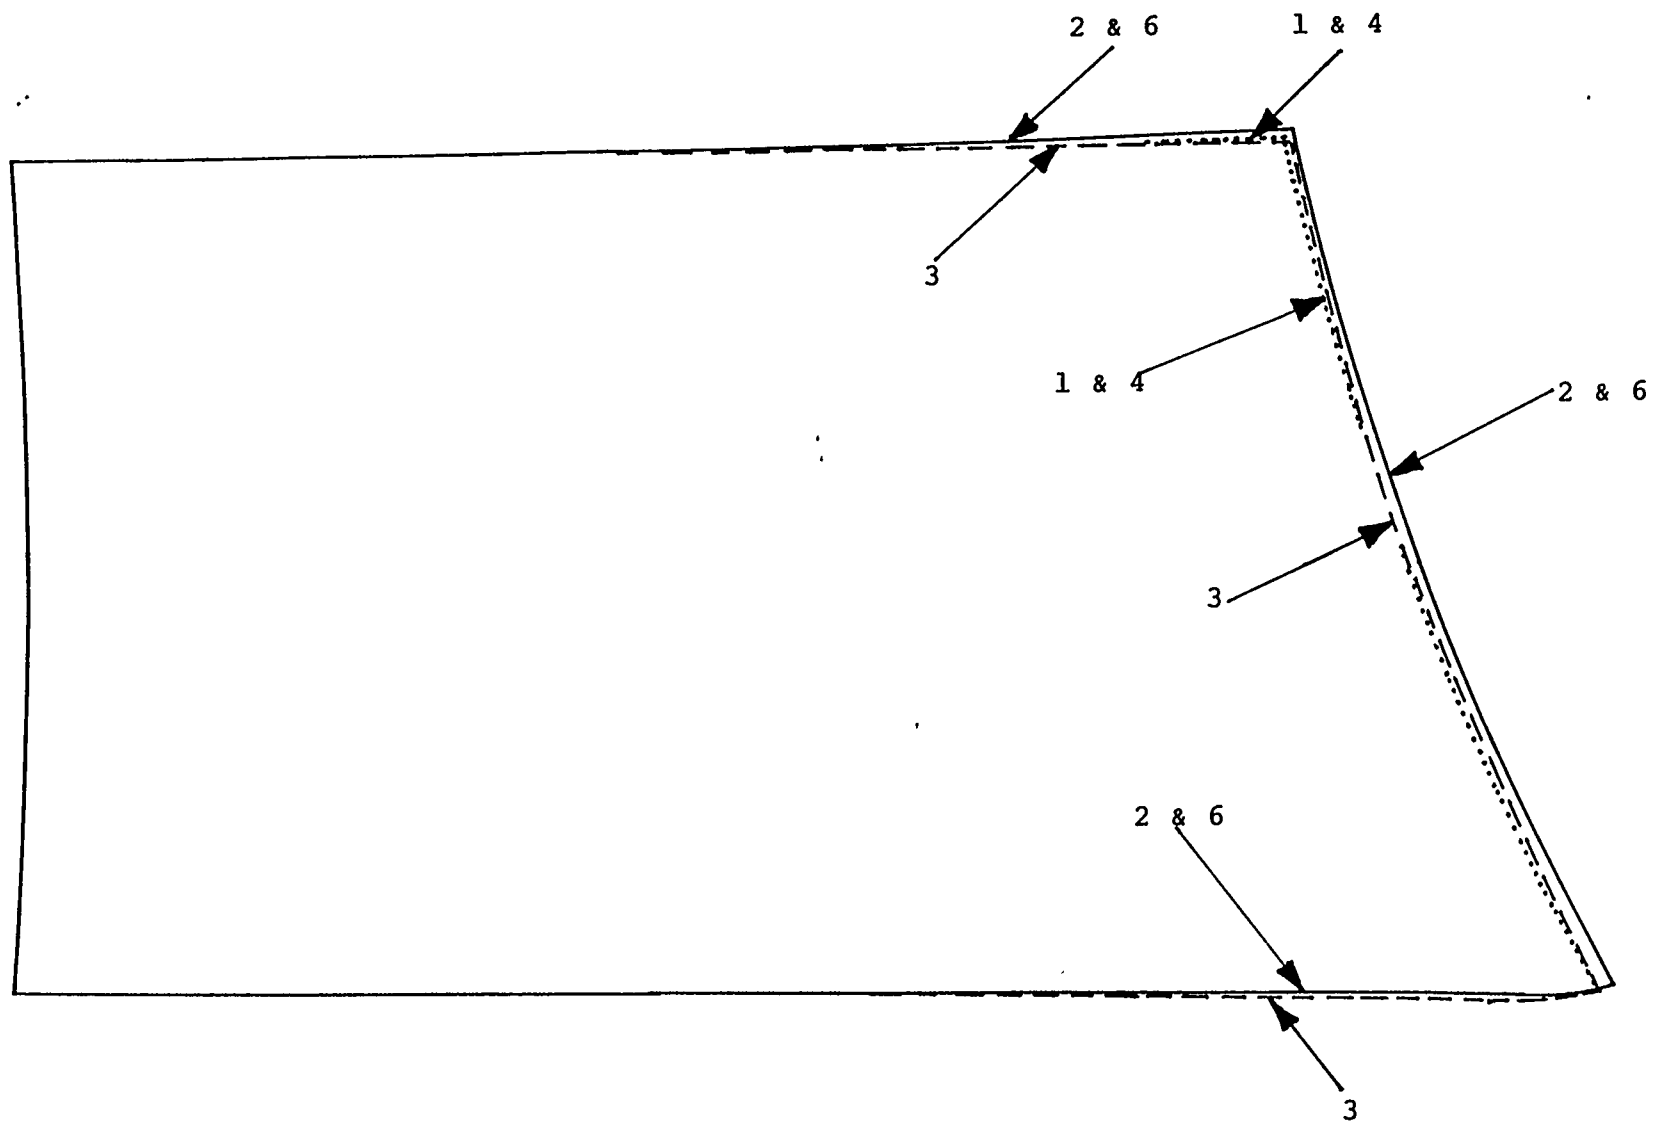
TEST CASE 1 DEVELOPED PLATE OUTLINES
